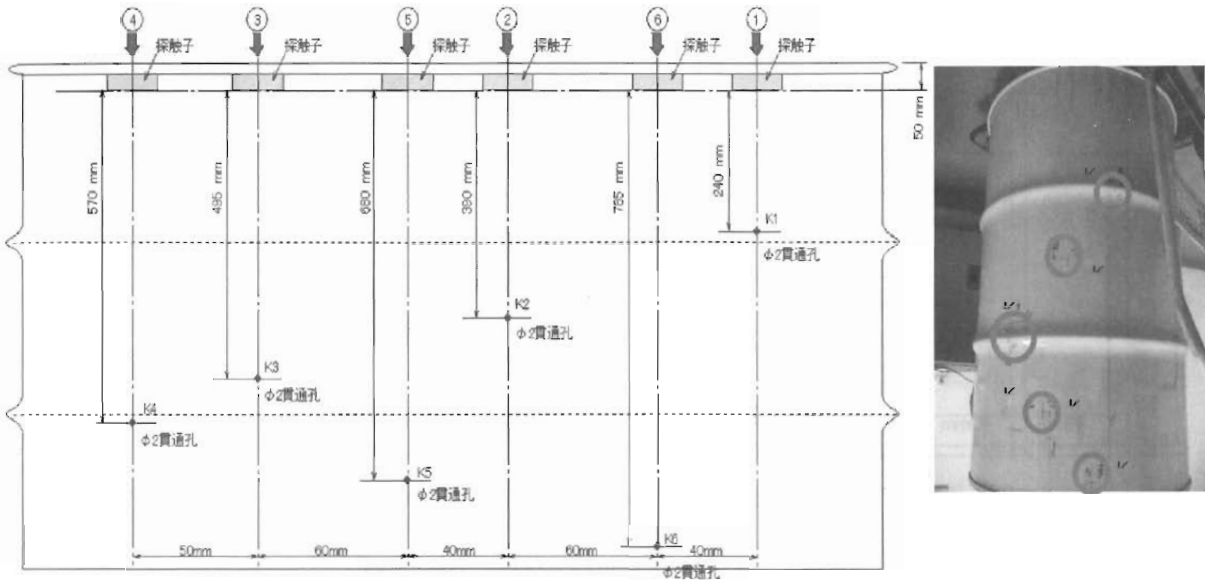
Piercing Holes on Real Drum Test Piece (Side Panel)
